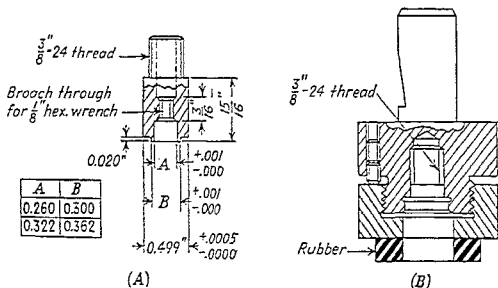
Hydraulic compensating staking die details: (A) circular staking tips; (B) staking-tip holder.
